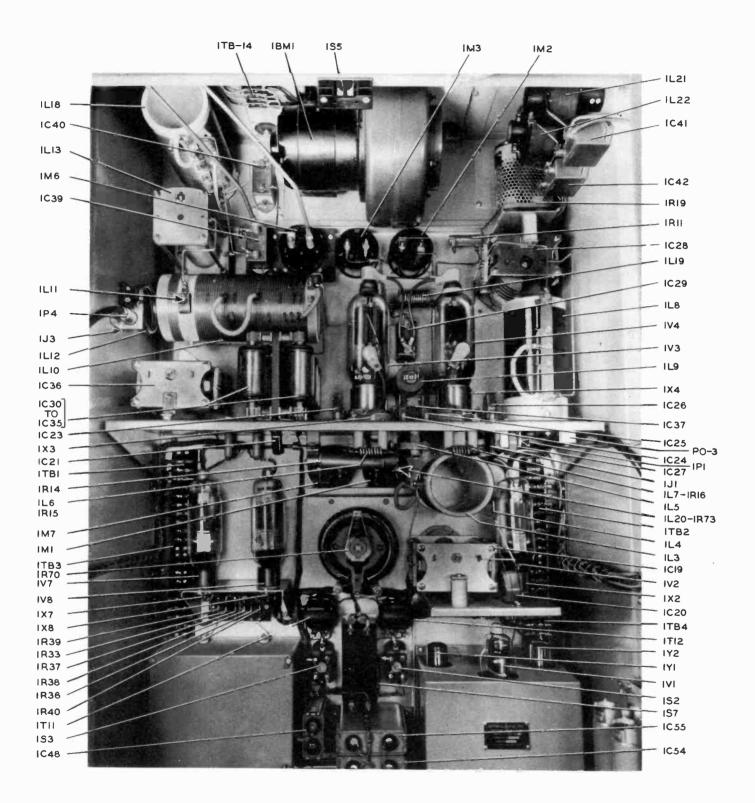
Rear View, Upper Panel, Parts Identified (SY2380A)
